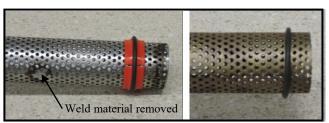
Cut location tool installation, 28mm Left, 30mm Right.
